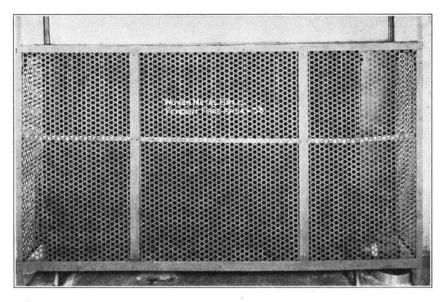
ENCLOSURE WITH WOVEN METAL GRILLE CONSTRUCTION
